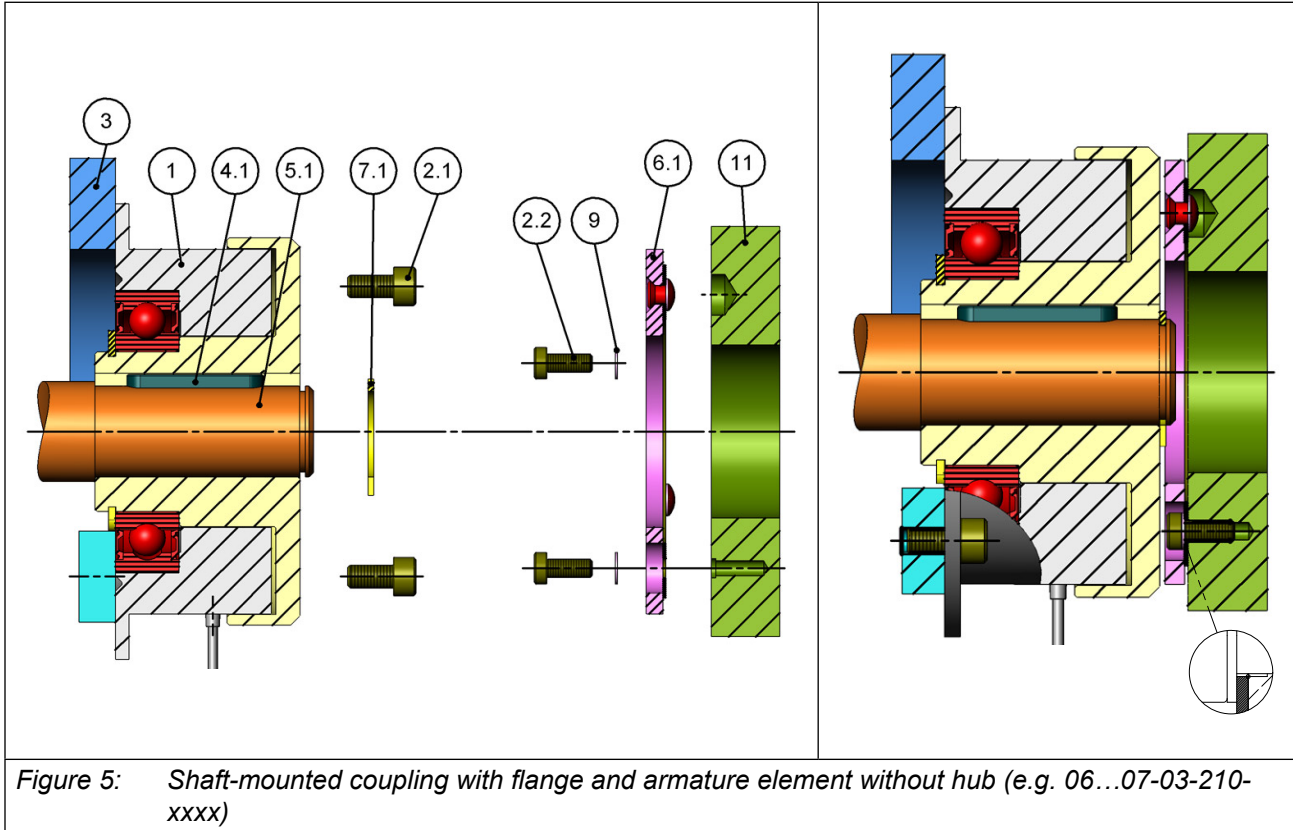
Shaft-mounted coupling with flange and armature element without hub (e.g. 06...07-03-210-xxxx)
